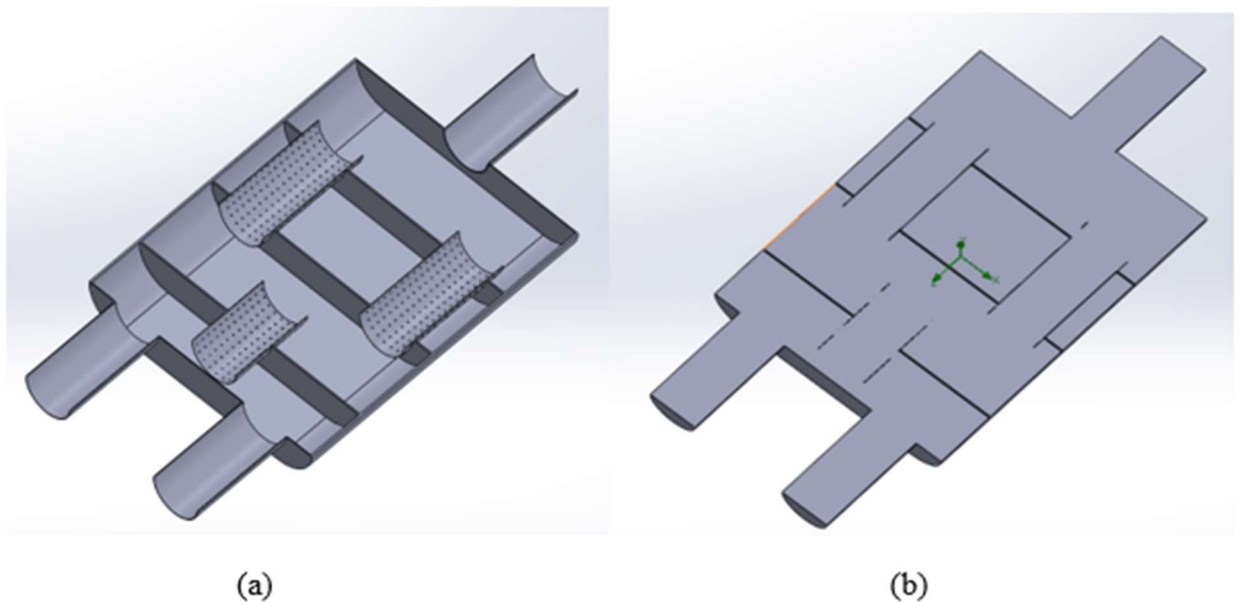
Cut section of the design-3.3 muffler model and (b) cut section
